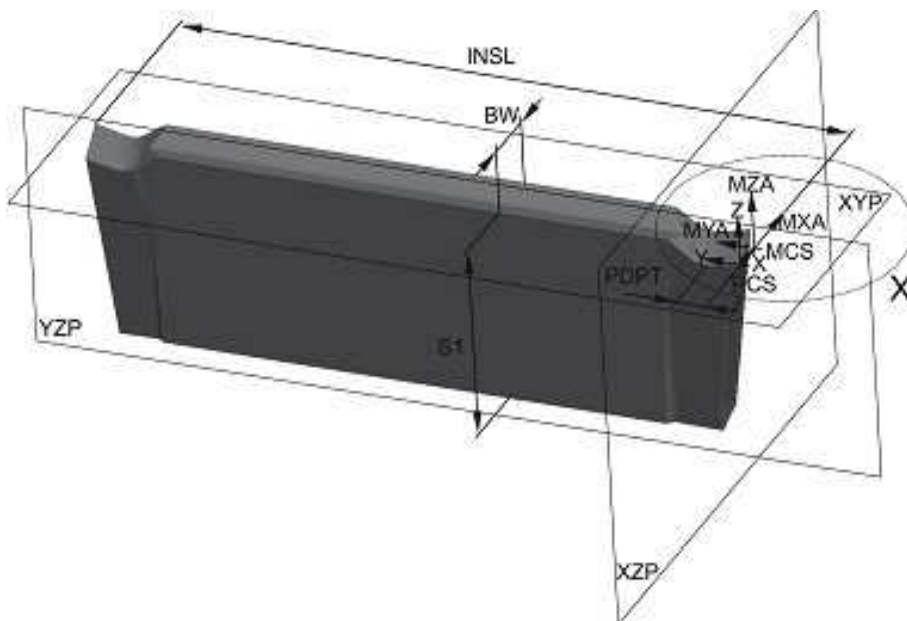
Self-clamping parting insert with two cutting edges: basic model
